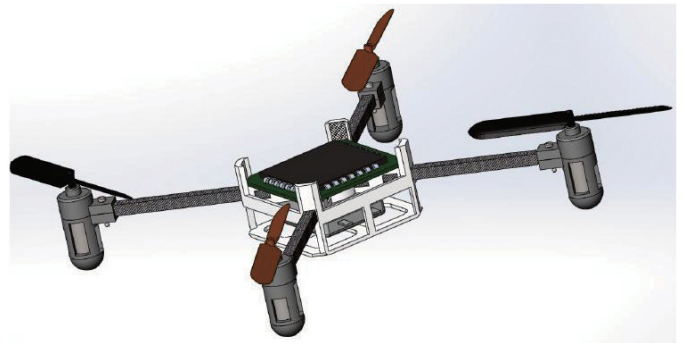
Full micro quadrotor body designed in SolidWorks with dimension (in mm).
